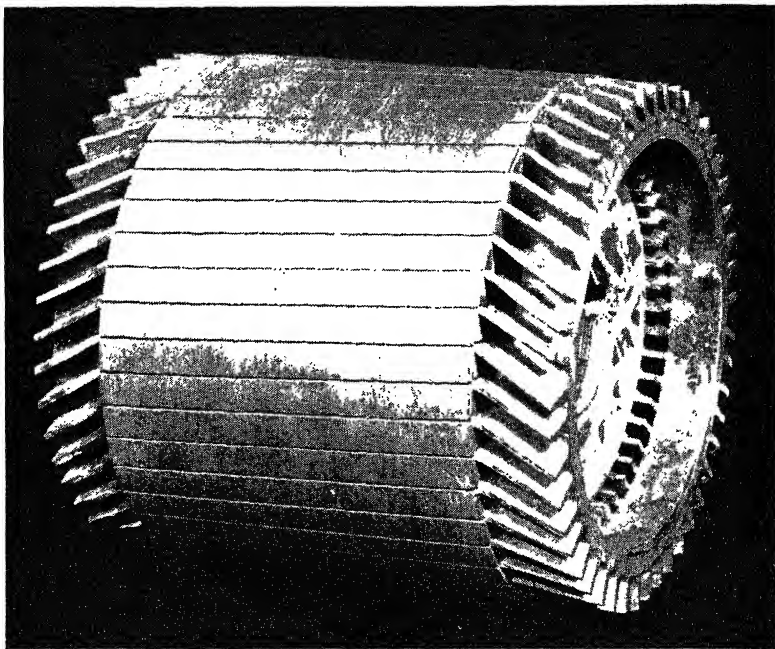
Squirrel-cage rotor with 96 silver alloy brazed joints.
